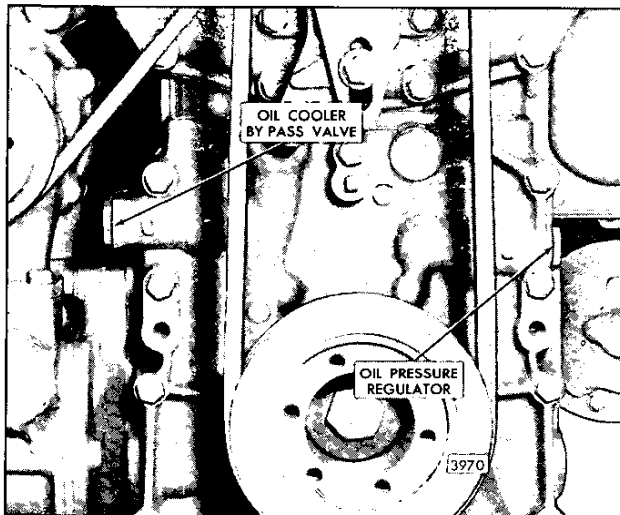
Location of Current Oil Pressure Regulator Valve (In-line Engine)
